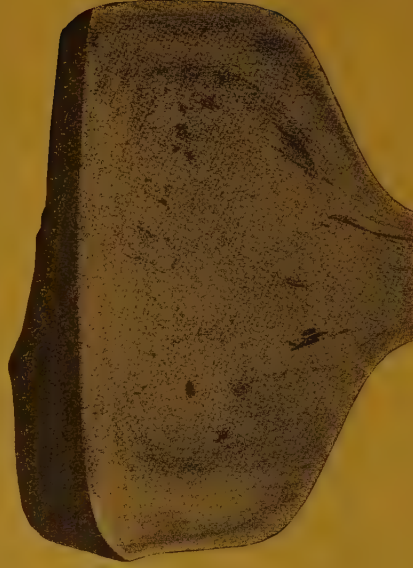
Macrograph showing segregation which caused breakage by cracking.
